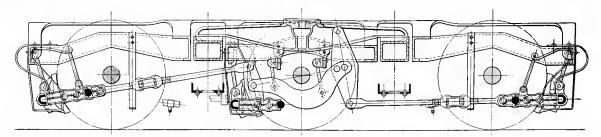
Harriman Lines Arrangement of Brake Rigging for Triple Brakes on Six-Wheel Passenger Train Car Trucks. Chicago Railway Equipment Company.
